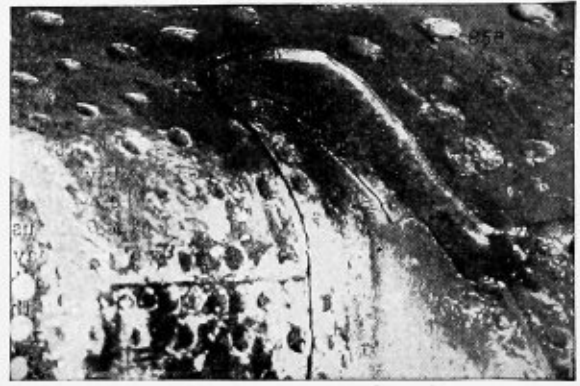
Ear of Throat Sheet Welded; Work Done Overhead with the Metallic Electrode
